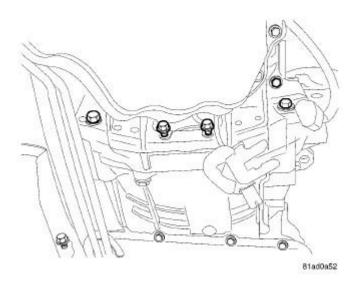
BELL HOUSING BOLTS Courtesy of CHRYSLER LLC
